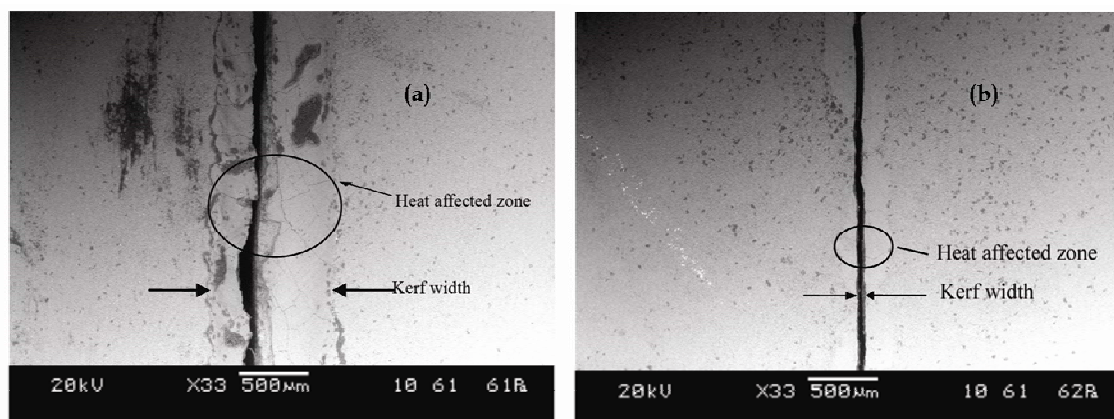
(a) Top view of the cut path in air cooled thermal fracture and (b): in LWJ cutting
